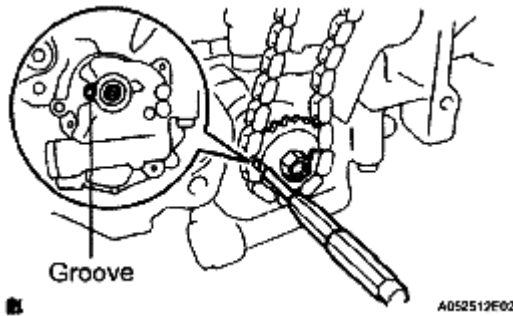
Identifying Adjusting Hole Of Oil Pump Drive Shaft Gear With Groove Of Oil Pump
